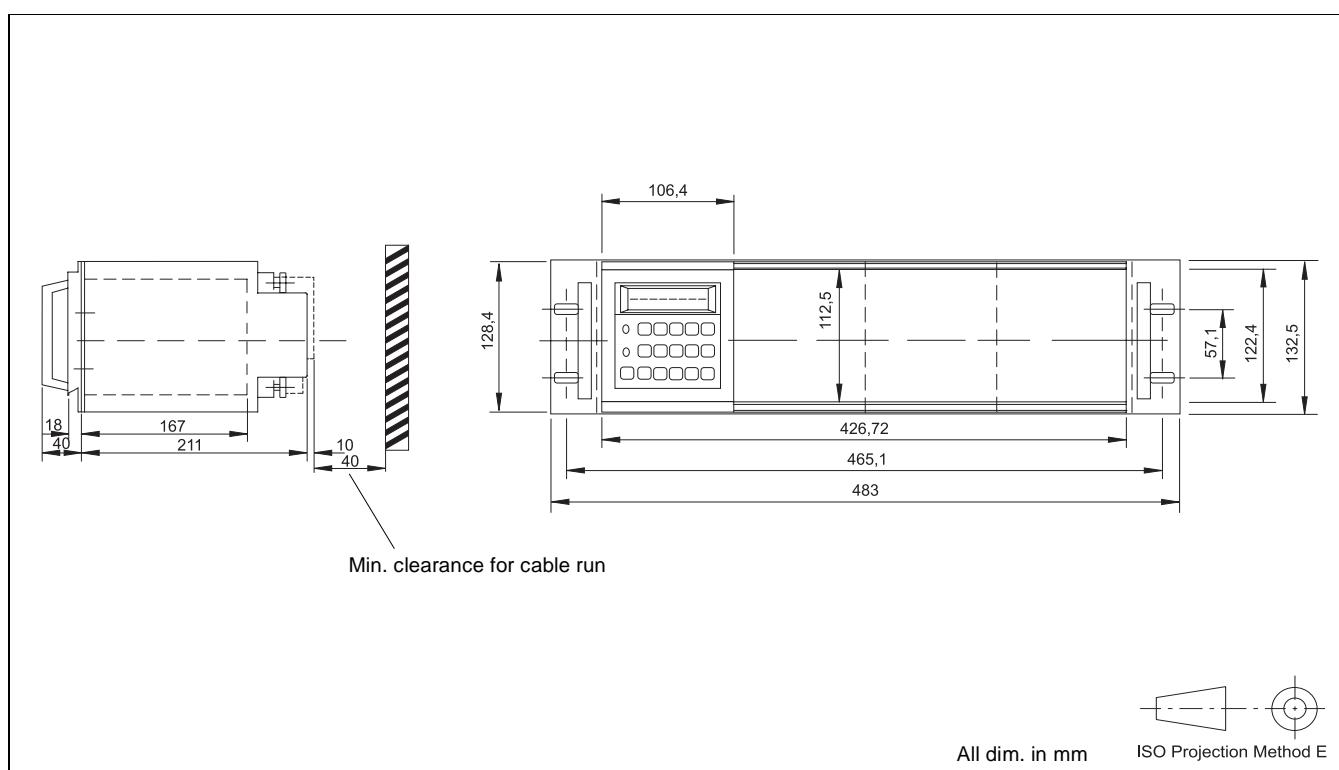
Dimension drawing for 19" rack mounted 50VM1000 converter
